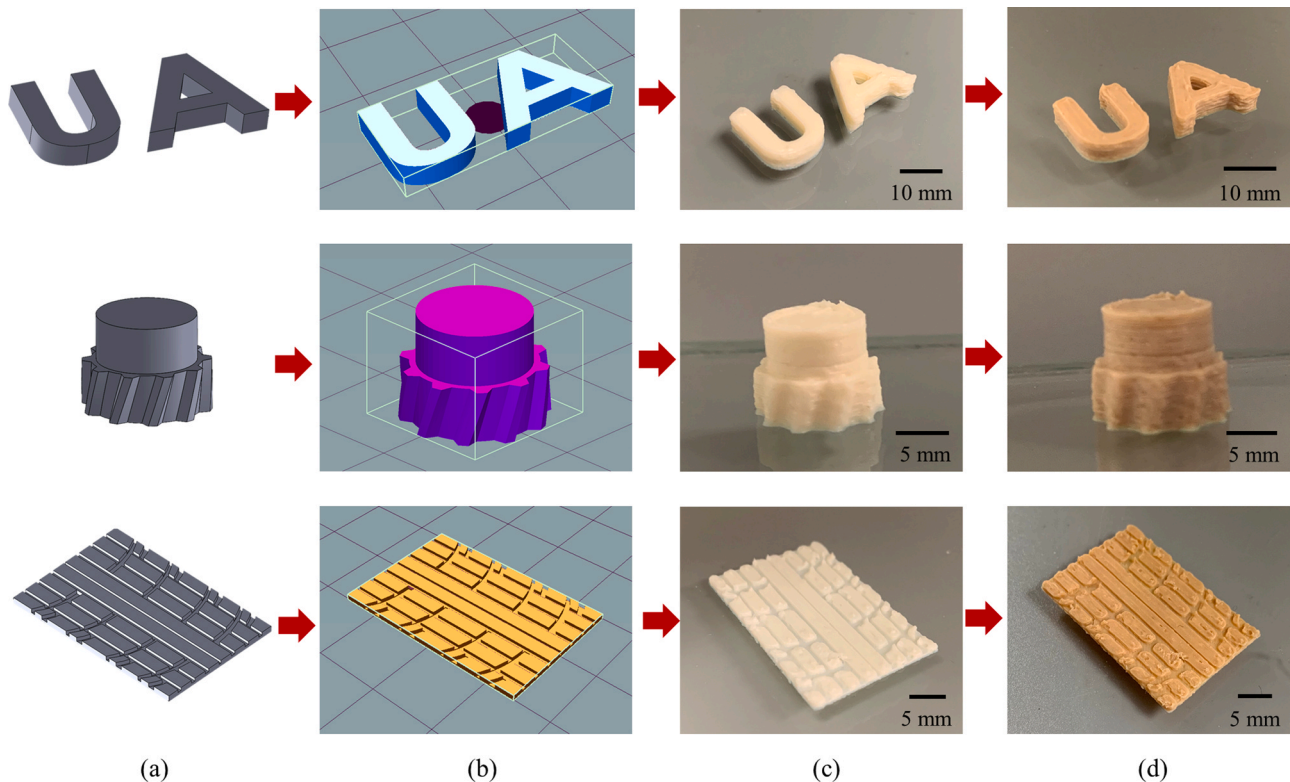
3D Structures fabricated by DP using BN-3 rubber ink: (a) CAD models designed in SolidWorks®, (b) tool paths created using a slicing program, (c) 3D printed green parts, and (d) final vulcanized parts.
